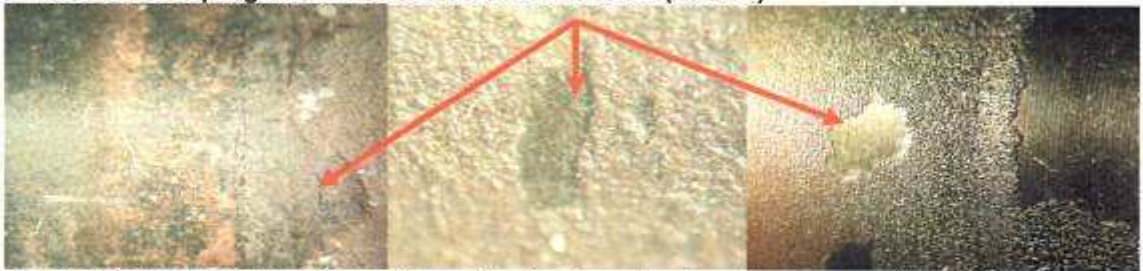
Hard carbon deposits on No 2 exhaust valve stem areas (stereo)
